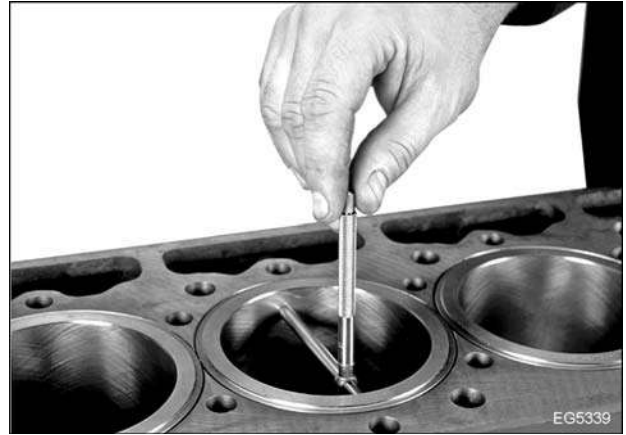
Checking cylinder sleeve inside diameter with telescoping gauge
